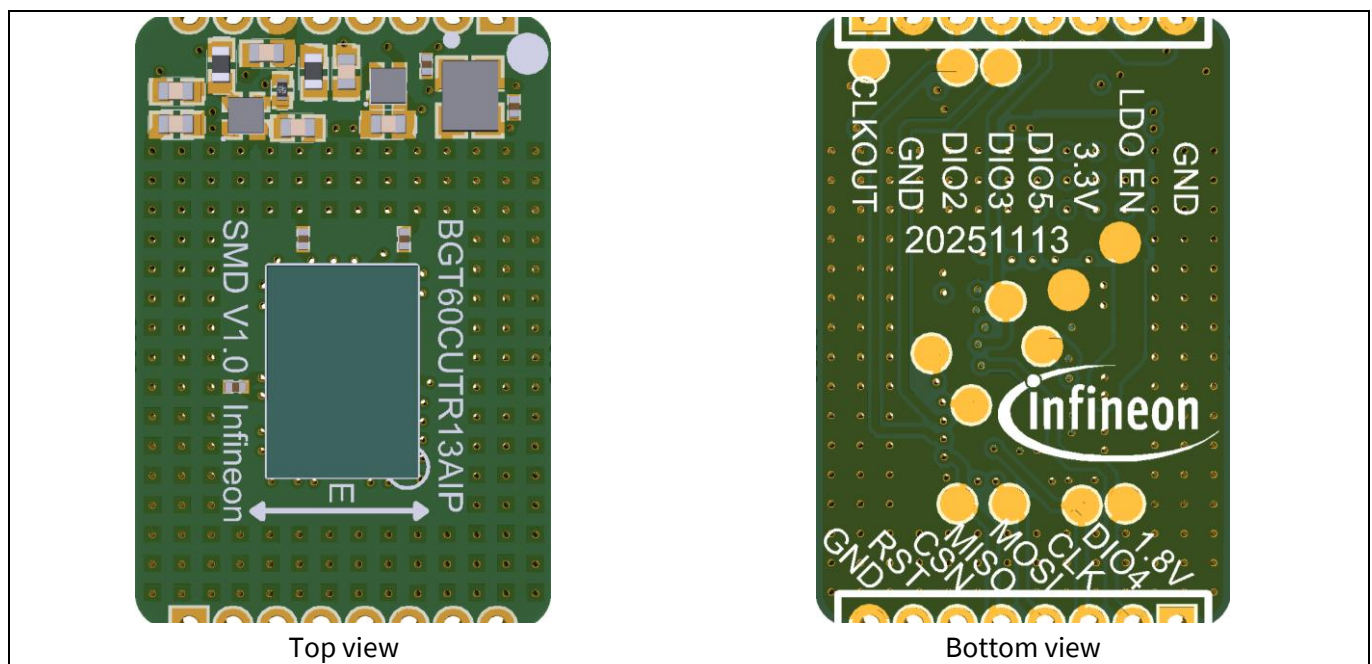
XENSIV™ BGT60CUTR13AIP SMD V1.0 PCB top and bottom views
